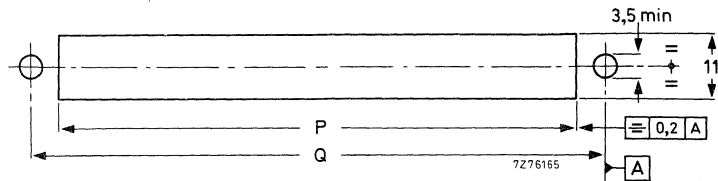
Panel cut-out; see Table 3 for dimensions P and Q.
